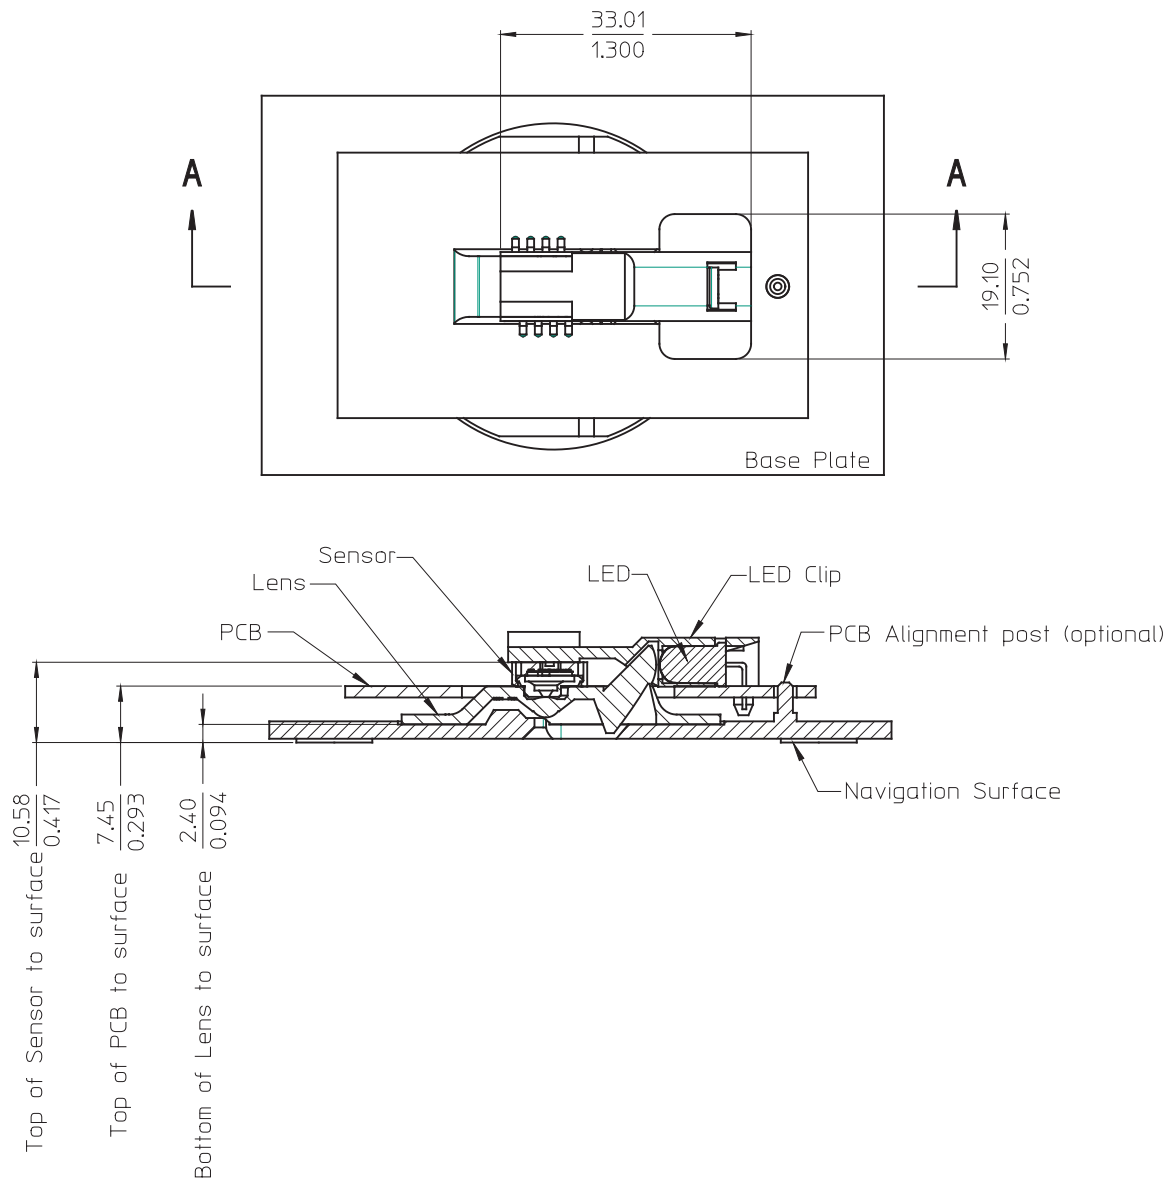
2D Assembly drawing of ADNS-5060 (top and side view)
